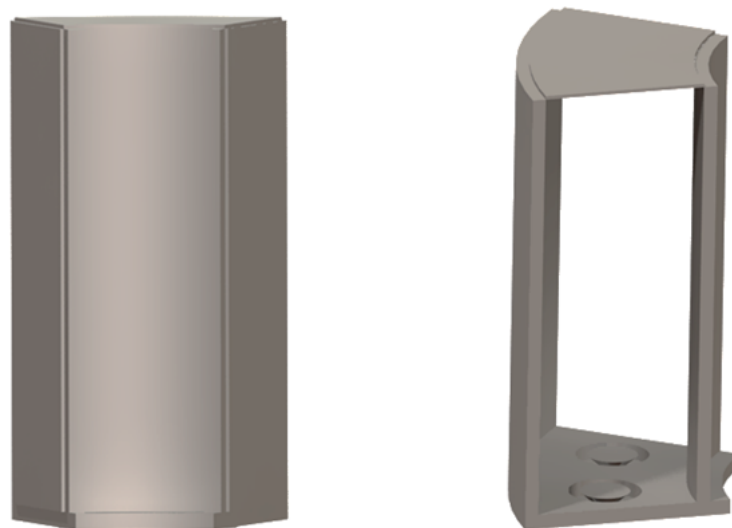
Twin burner CAD renderings, front view (left), side - inner view (right).
